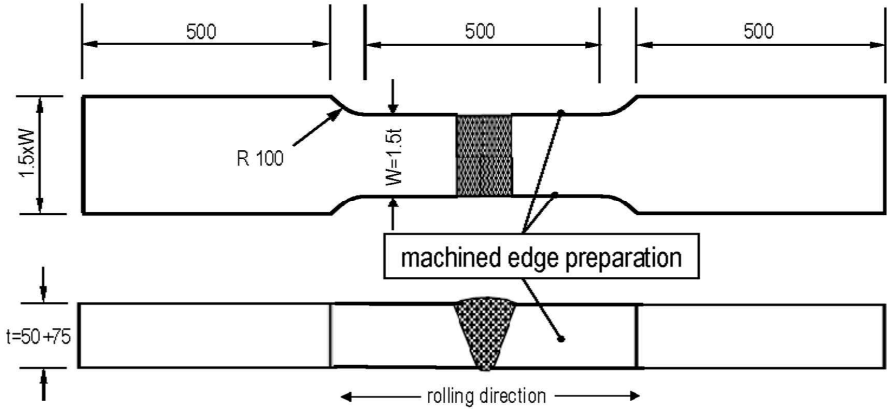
Butt weld specimens(50mm, 75mm)
